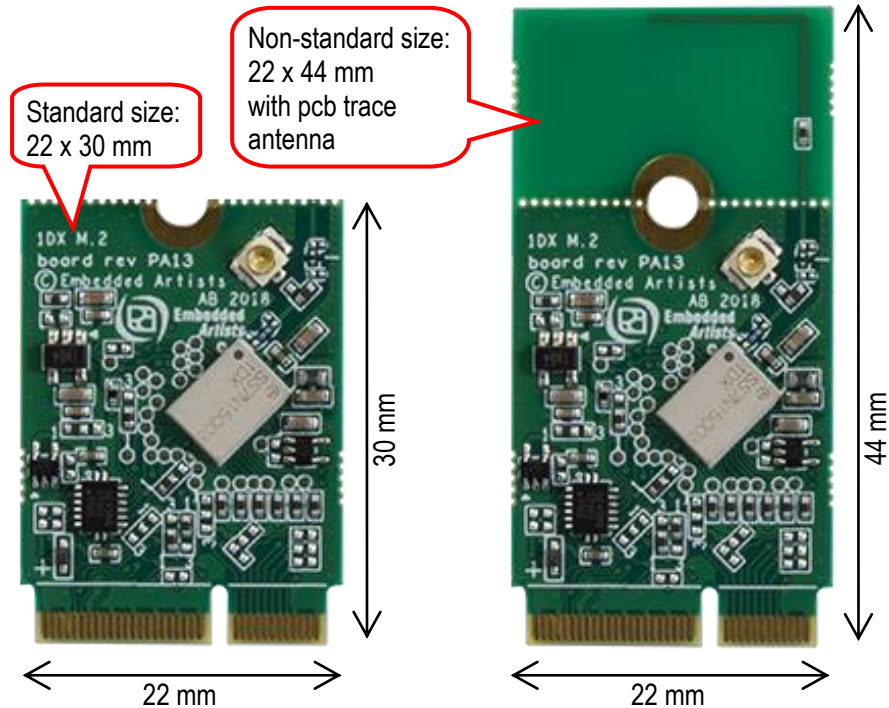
M.2 Module with, and without, PCB Trace Antenna
